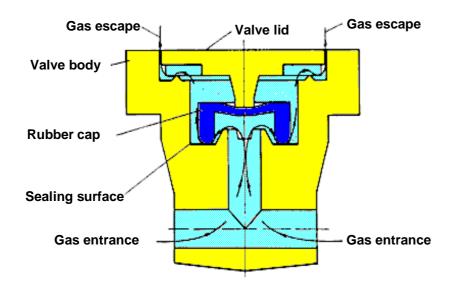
Valve system of Sonnenschein-Gel-batteries. Valve without adaptor and without protection cap.
